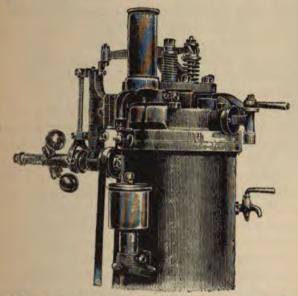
CAMPBELL VERTICAL GAS ENGINE, SHOWING UPPER PART OF CYLINDER AND VALVE GEAR.
